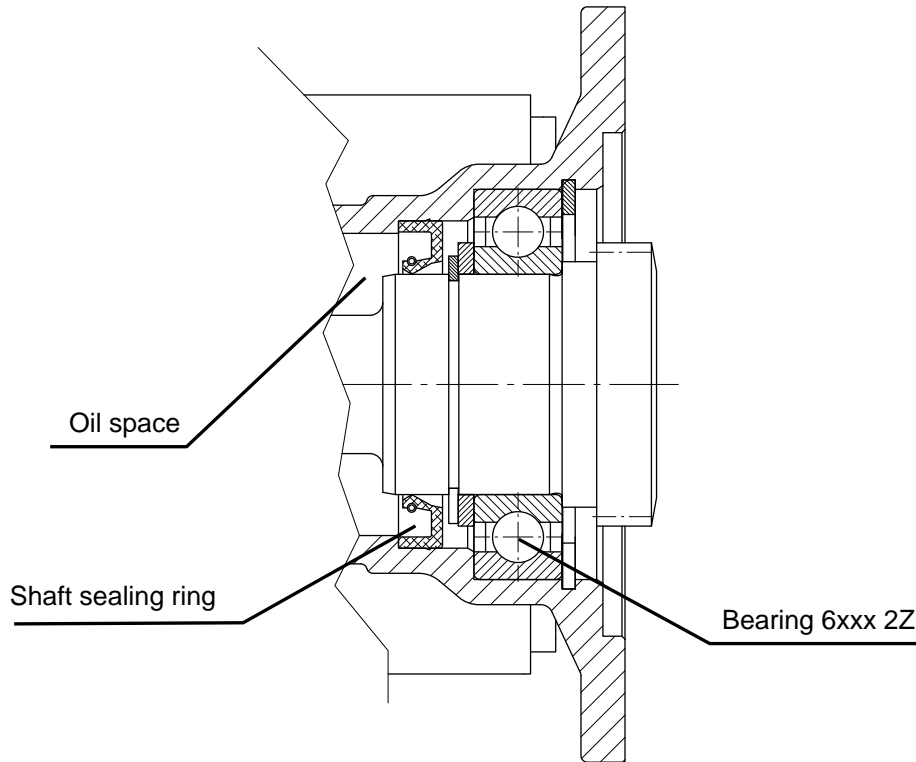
Drive shaft bearing and seal on the coupling side of universal worm gear units
